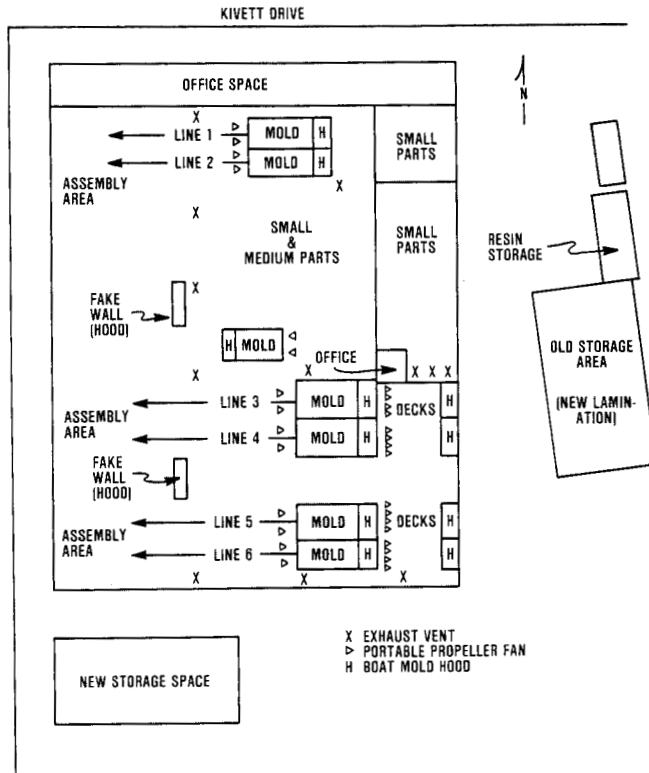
Plant C—lamination building layout, High Point, North Carolina.
